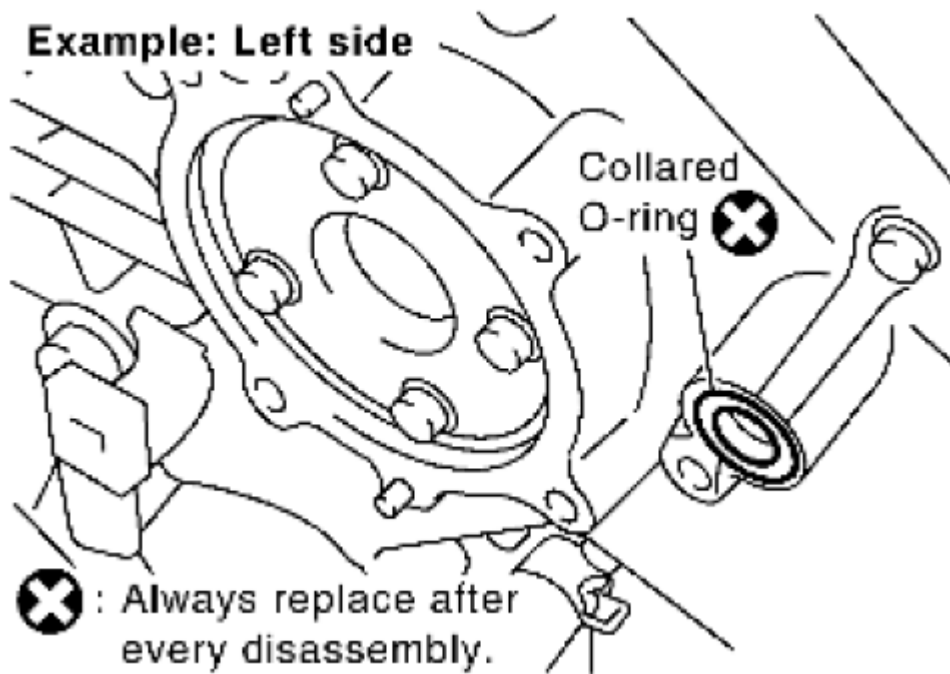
Identifying Intake Valve Timing Control Covers
